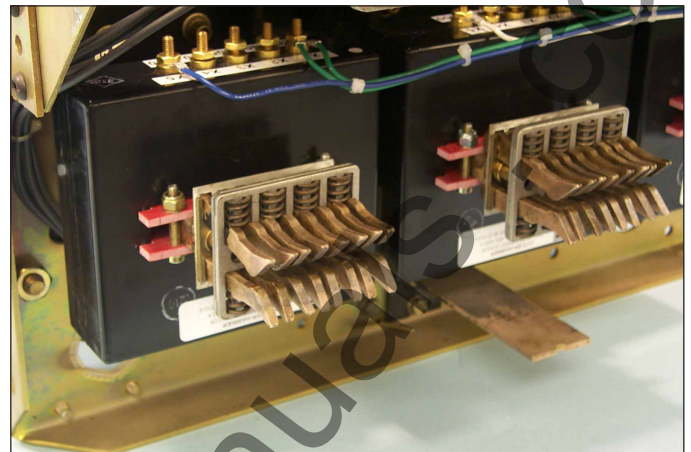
Finger Clusters Reinstalled on the Bottom Breaker Studs.
